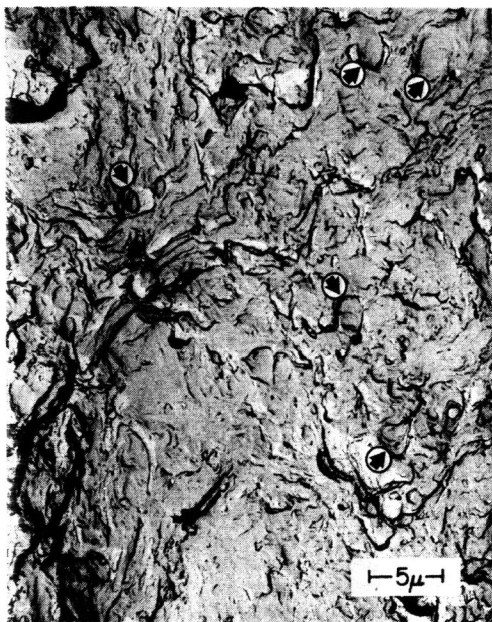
HIGH-STRESS FATIGUE FRACTURE OF LOW-ALLOY STEEL (A302B). Surface exhibits isolated dimples (arrows) and irregular surface markings.
